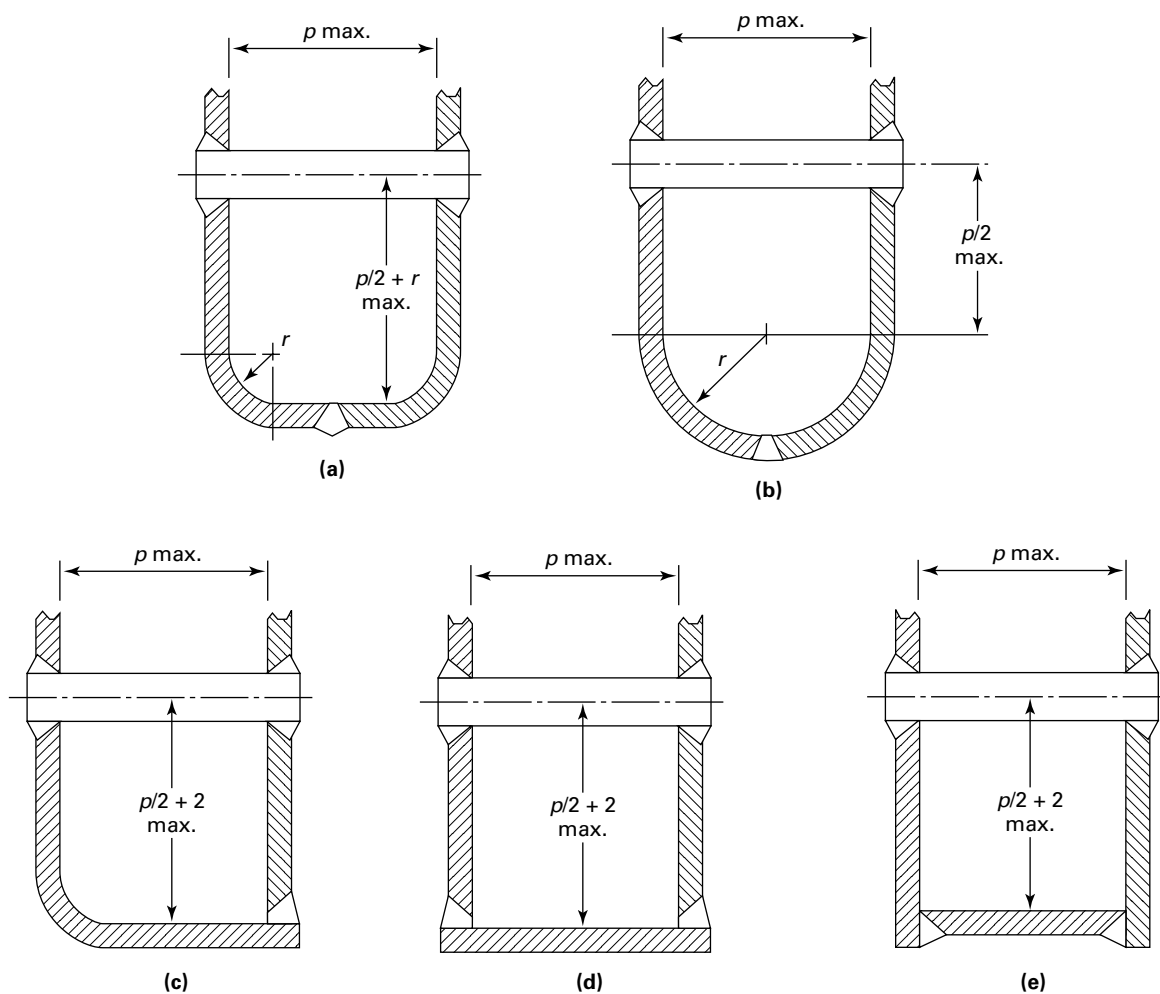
METHOD OF FORMING WATERLEG JOINTS BY WELDING
